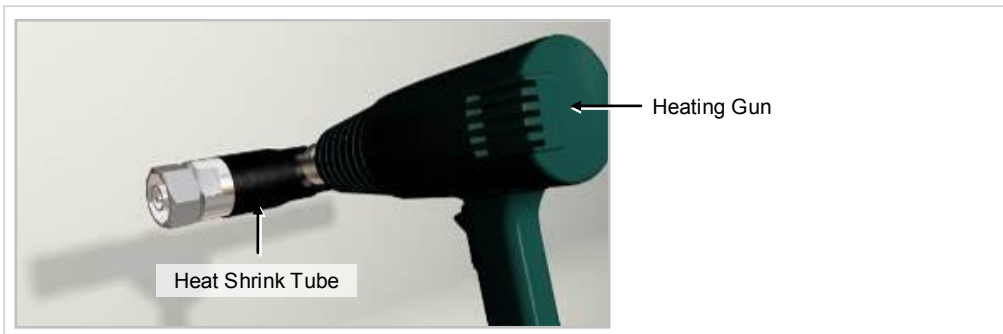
Assembling the Din type-male (1/2 in. Feeder Line) Connector (1)
